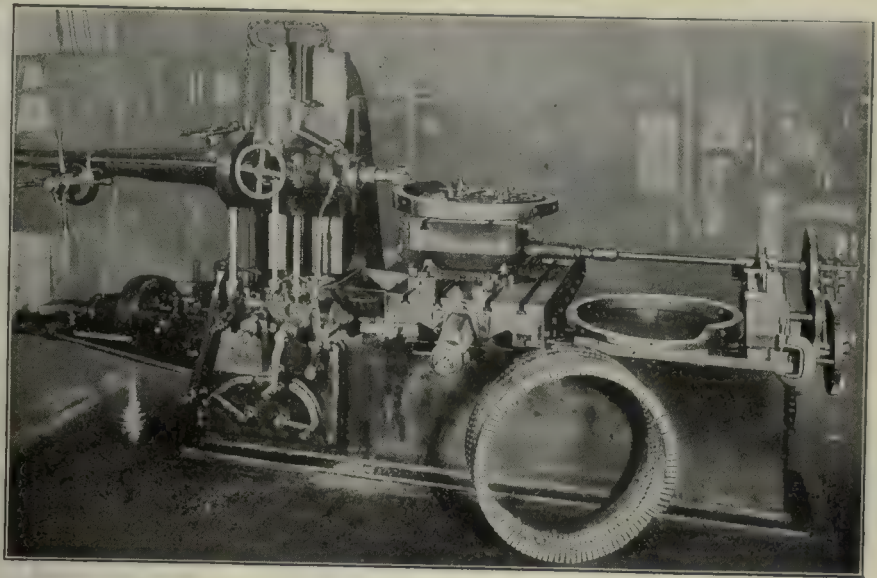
BORING MACHINE CUTTING LARGE CAMS
